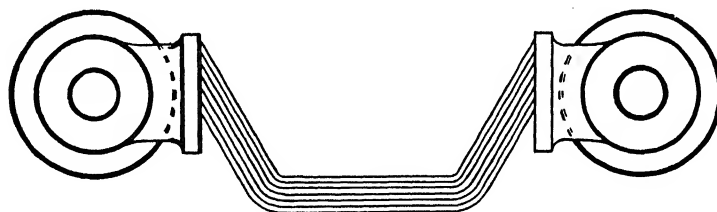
Laminated contact piece connecting solid contacts mounted on insulators.
